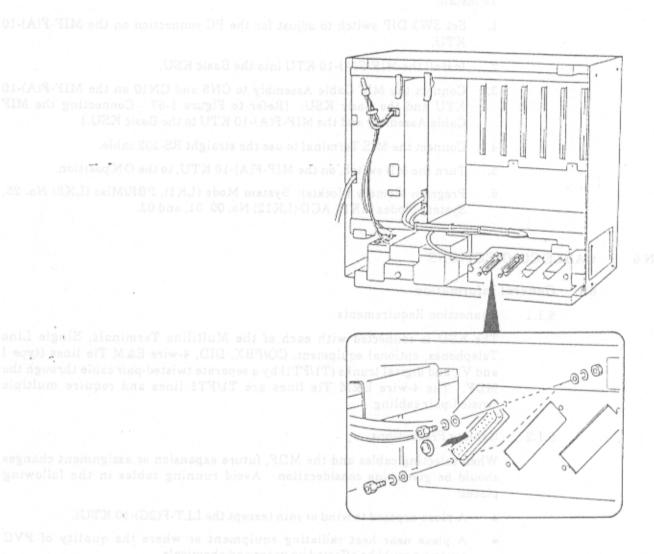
Connecting the MIF Cable Assembly and the MIF-F(A)-10 KTU to the Basic KSU
